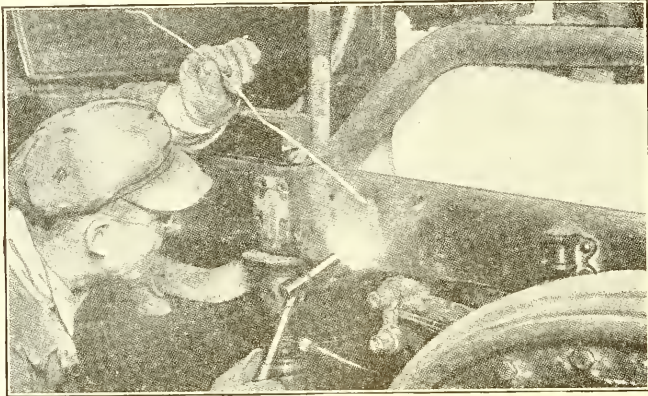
Welding Frame of 5-Ton Motor Truck.
